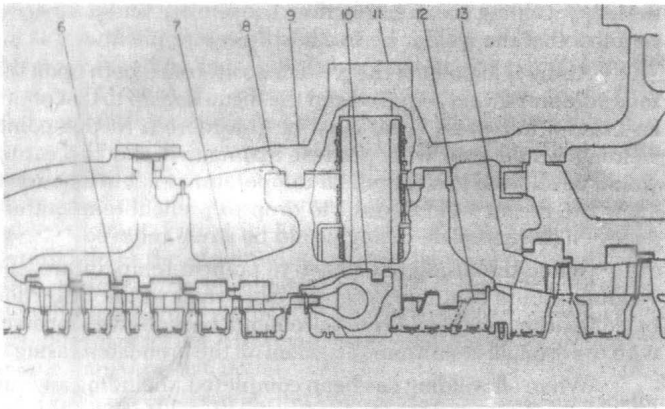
Cross Section Through High Pressure Section of Turbine Illustrating General Internal Geometry of Turbine Casings.
